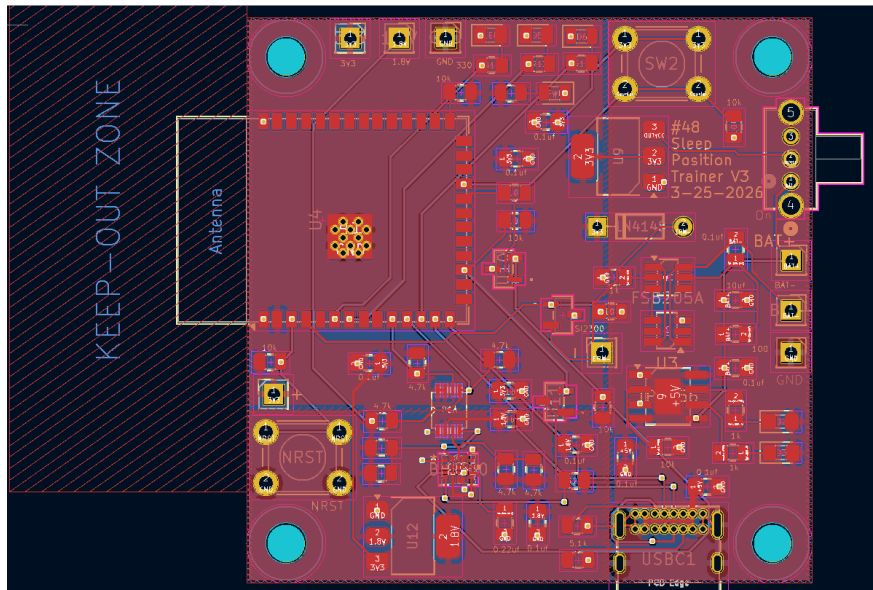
PCB Layout (Microcontroller Positioned on the Top-Left of the PCB)
